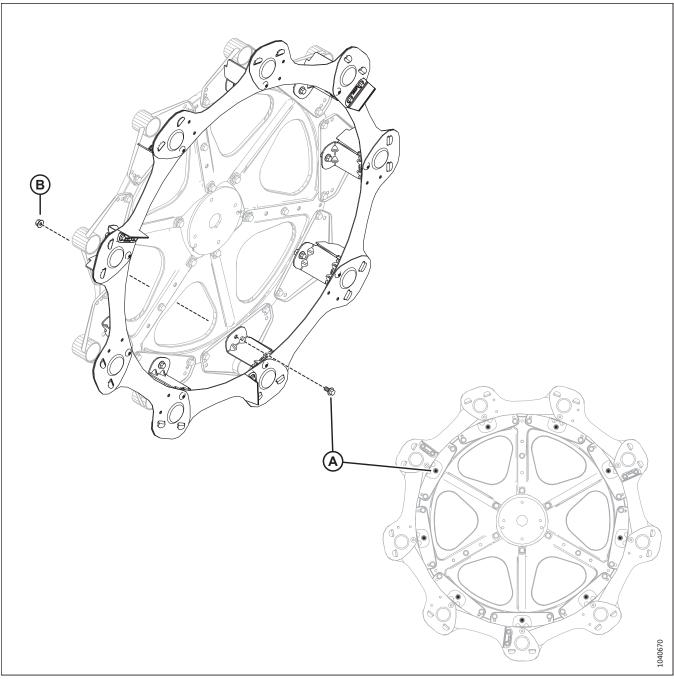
Nine-Bat Reel – Initial Endshield Assembly
